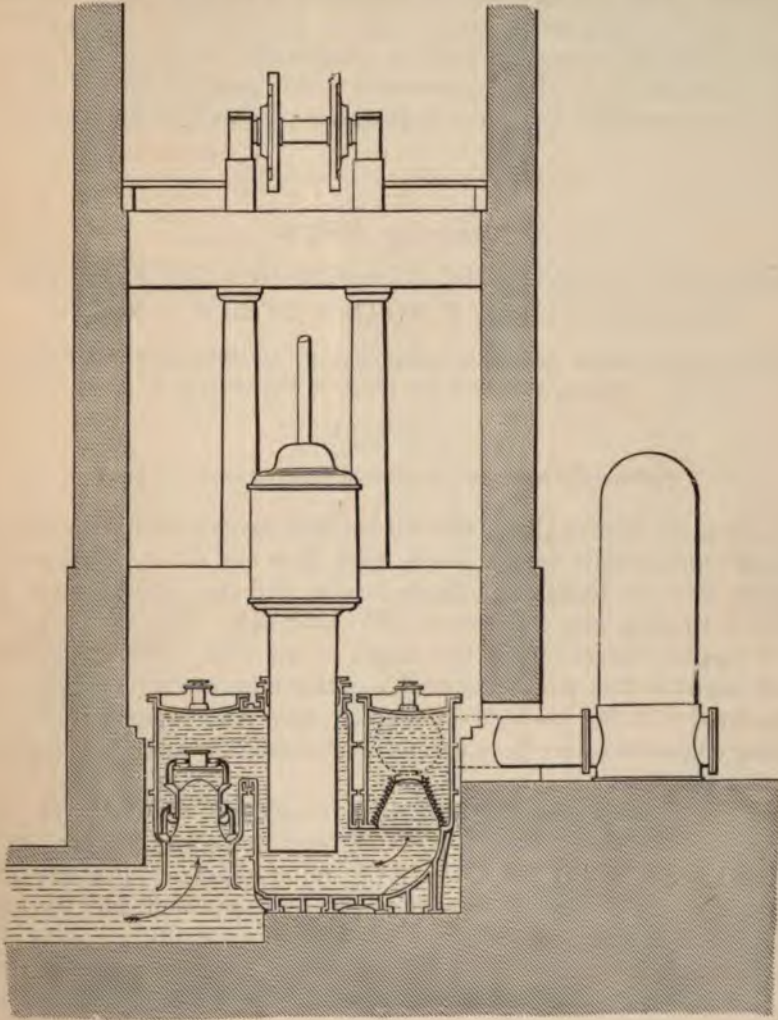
East London Water-works: Victoria Pumping Engine. Sectional Transverse Elevation. Scale 1/140th.
